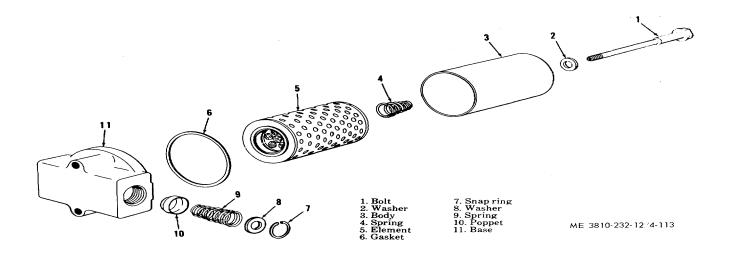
Hydraulic oil filter, disassembly and reassembly (model 2385).
